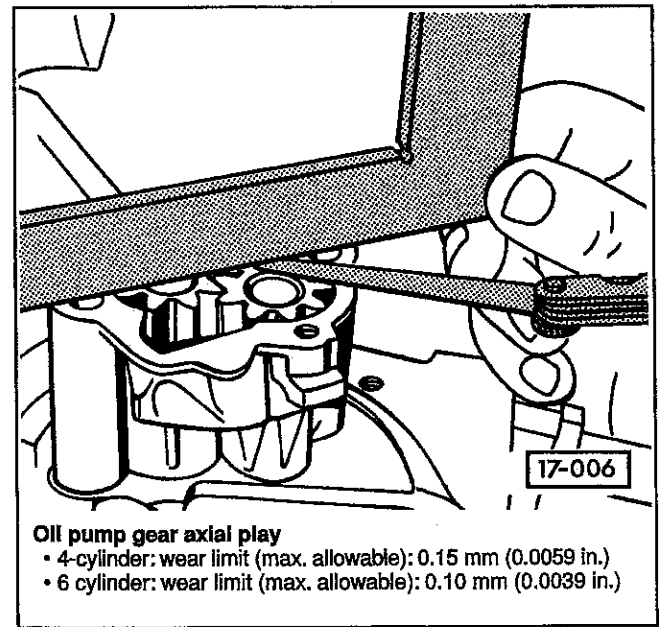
Oil pump gear axial play being measured using straight edge and feeler gauge.
